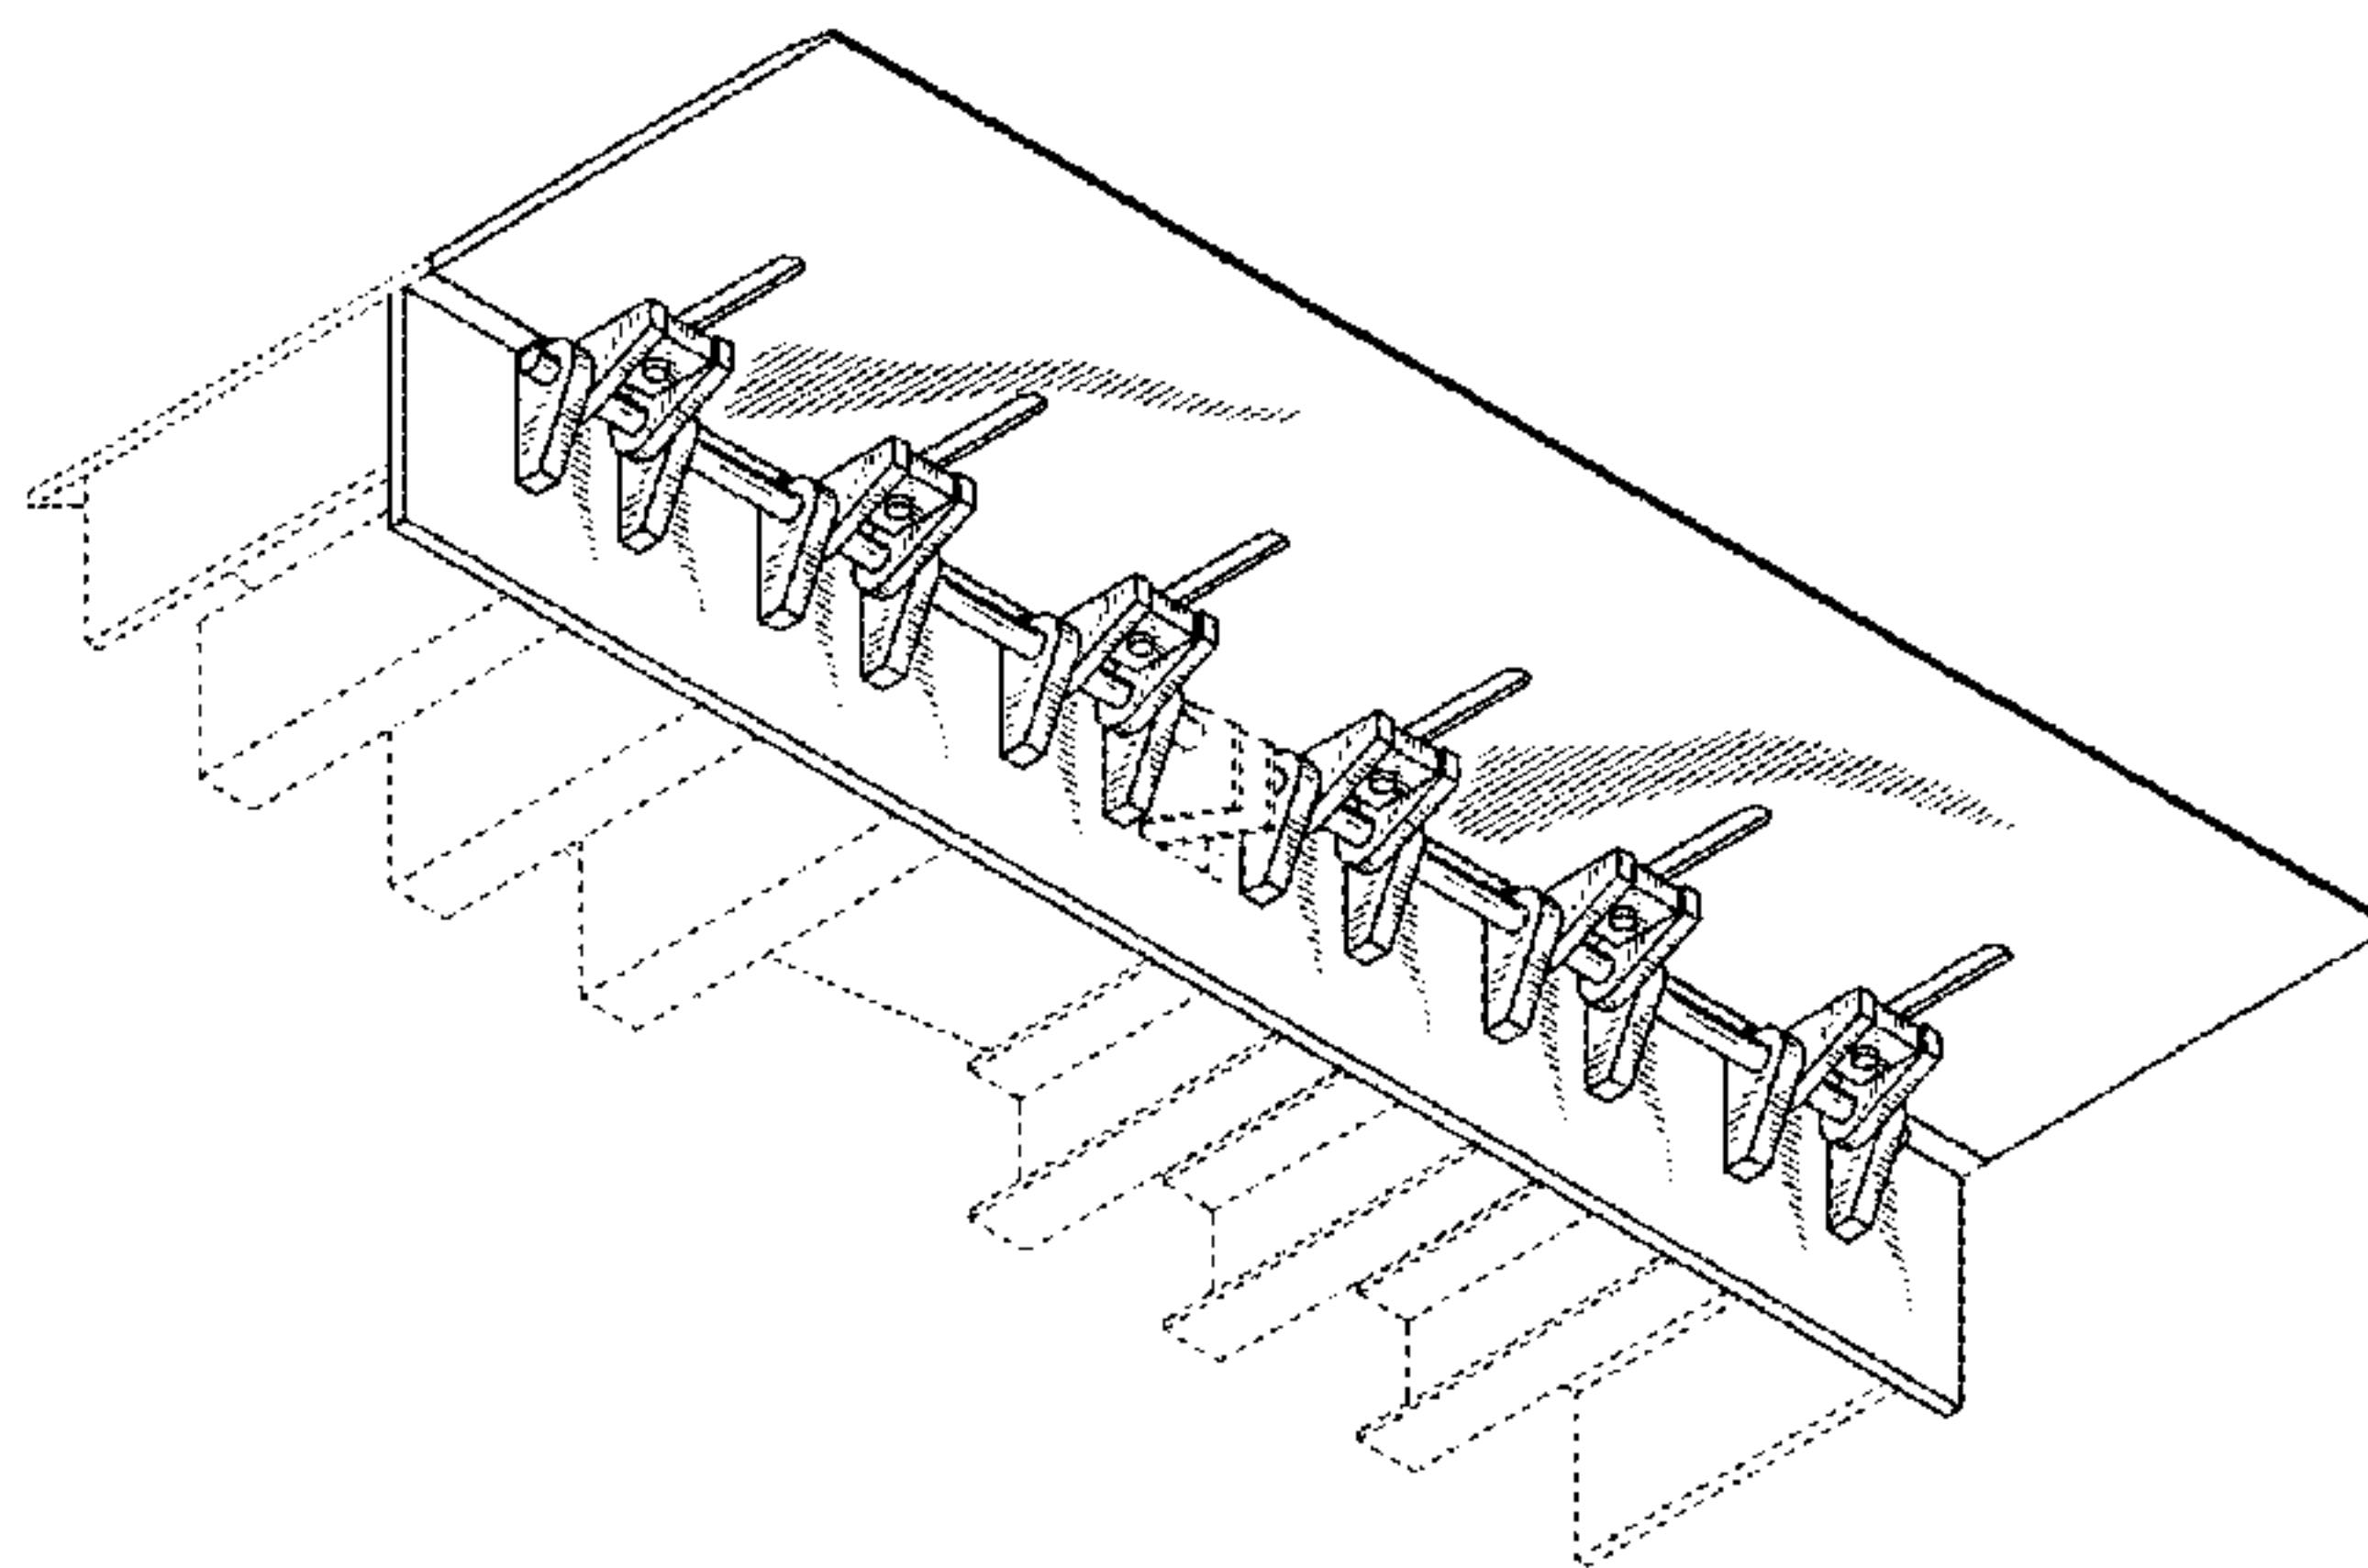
is a bottom view of the sliding barrier dock leveler, and showing the deck frame and drive brackets in broken lines;
